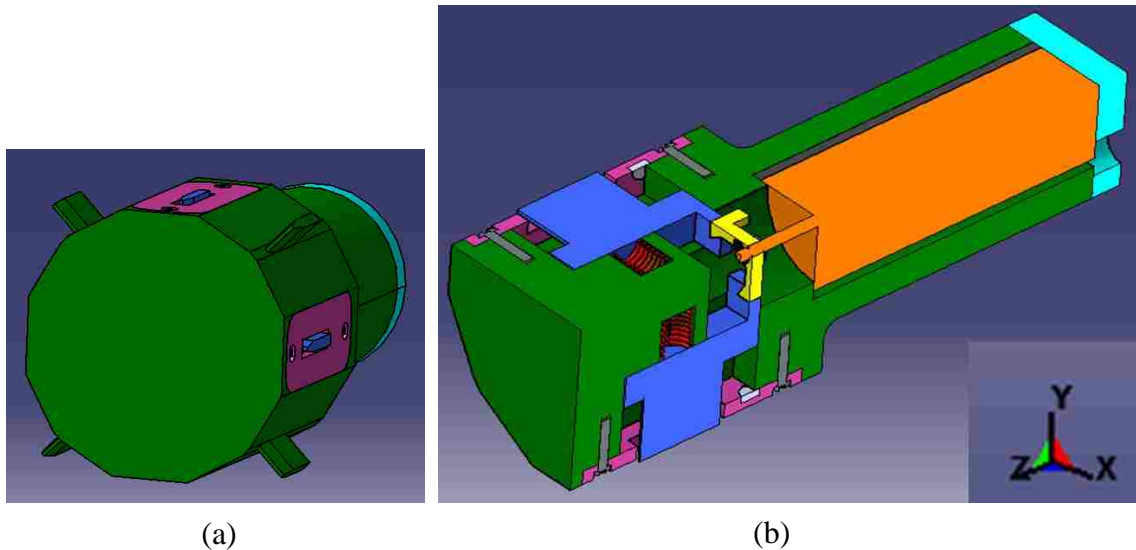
(a) CAD model of the first detailed adaptive cutter design. (b) Section views showing internal mechanics of device in 4-blade configuration.
